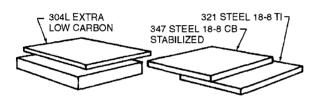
Prevention of Corrosion in Welded Stainless Steel
